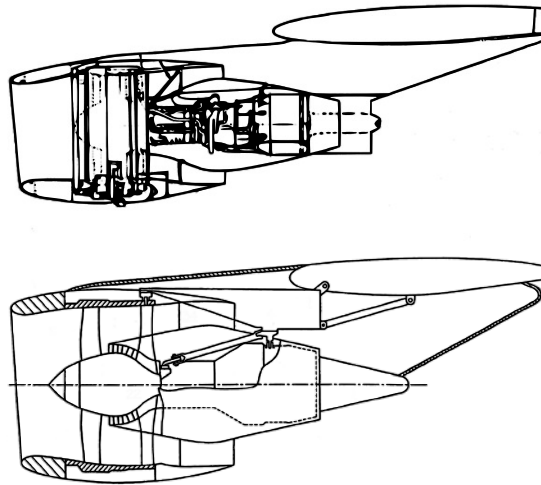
Sketch and technical drawing of underwing mounted LBPR and HBPR engines.
